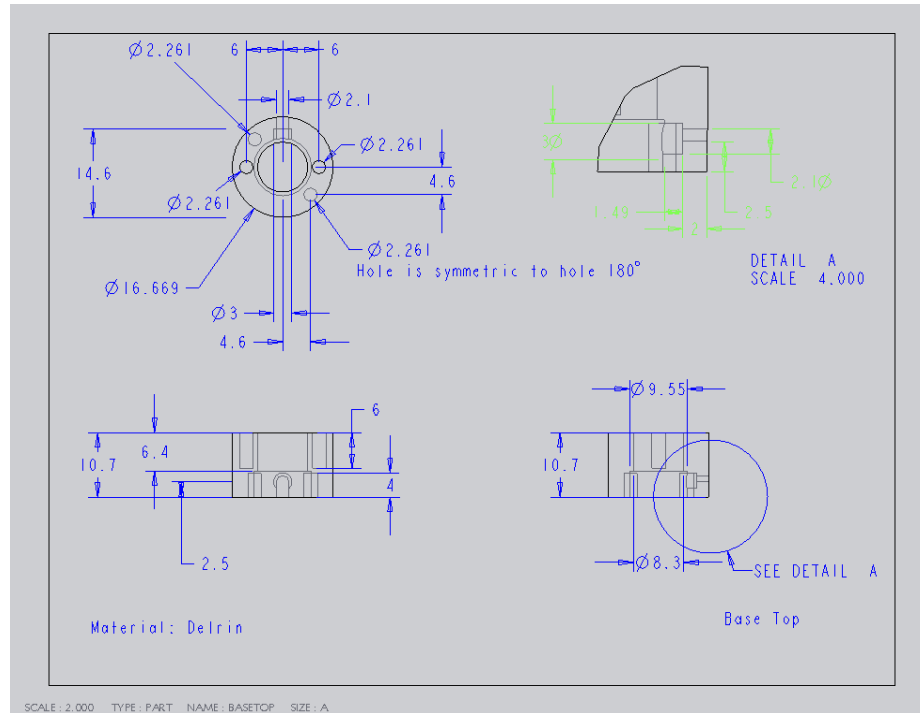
CAD Drawing of Top Half of Bottom Platen
